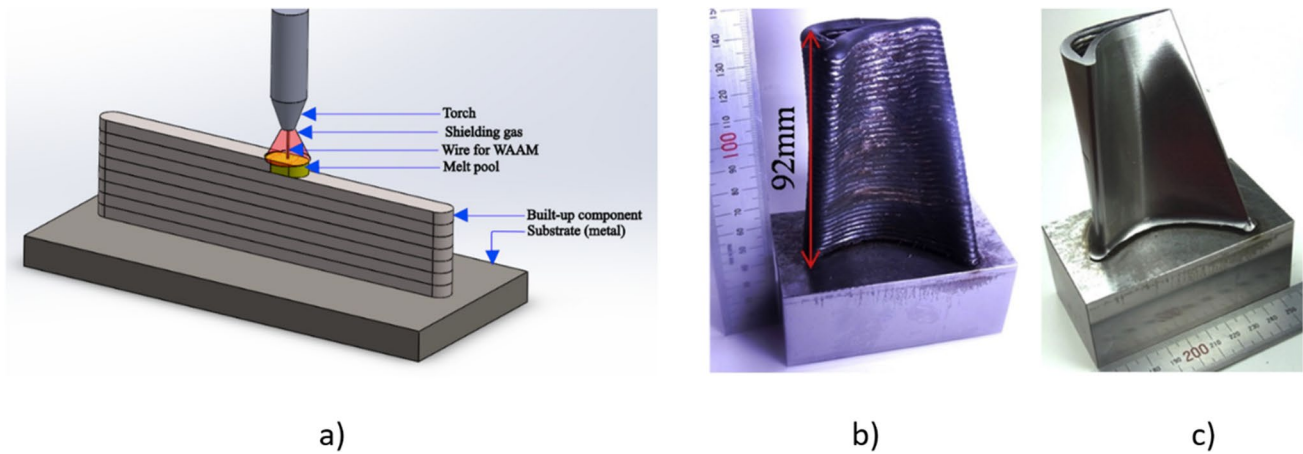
a Schematic of WAAM process [26]; an example of WAAM part b as deposited; c after finish machining [27]
